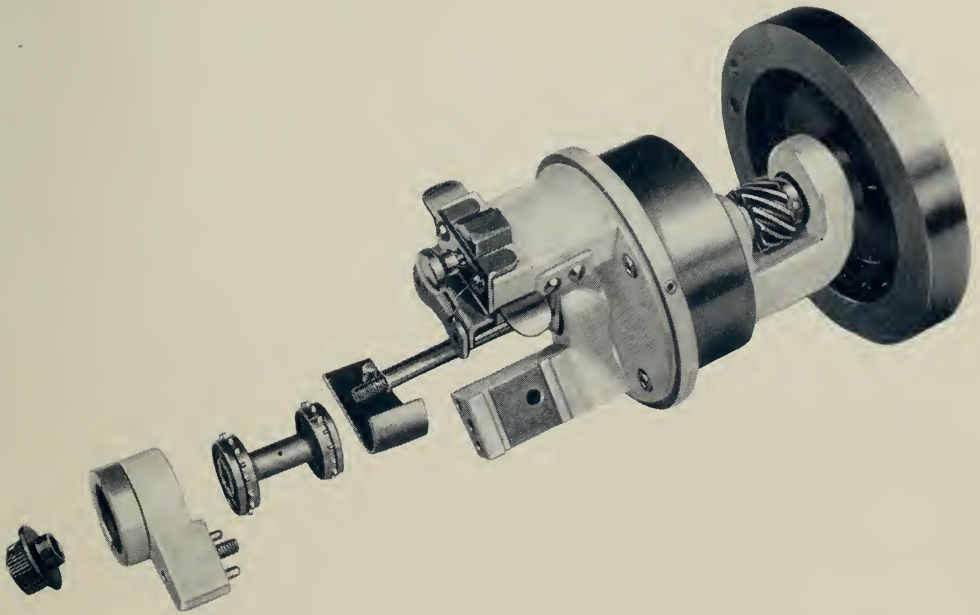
The intermittent movement of the Motiograph "AA" disassembled to show cap, bracket, sprocket, stripper plate and housing.
